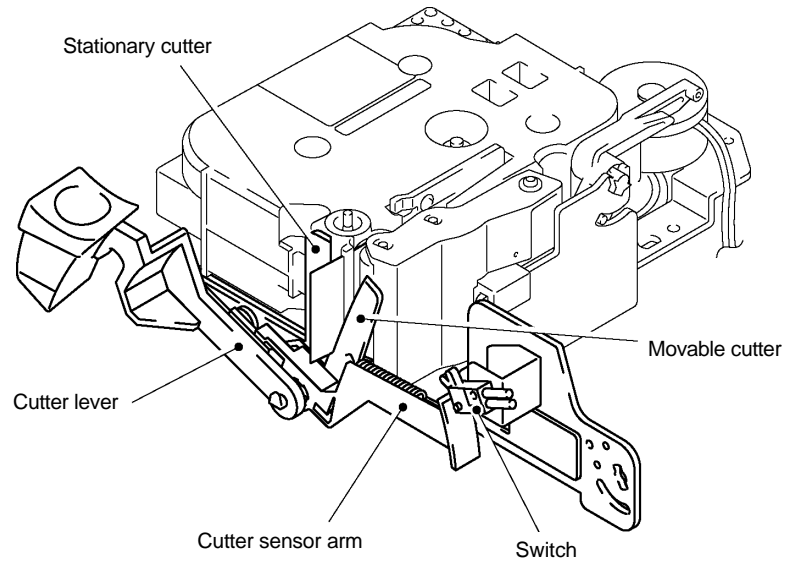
Tape Cutter Mechanism (PT-1850)
